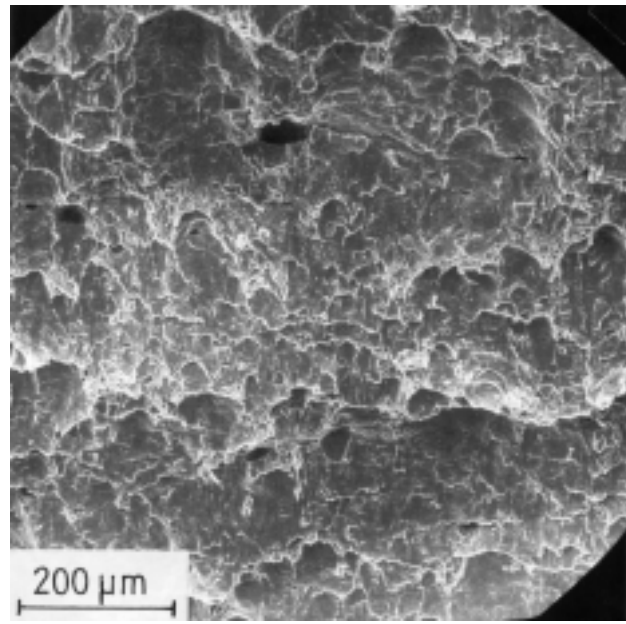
Mixed fracture surface morphology in the central part of specimen in Figure 9
